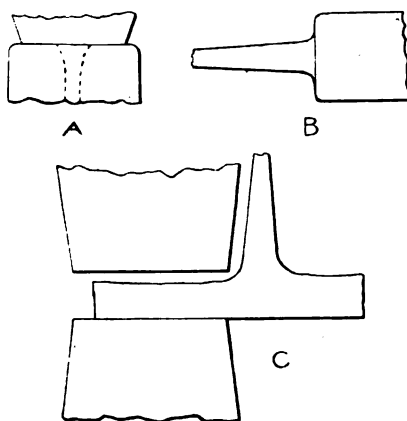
METHOD OF DRAWING DOWN STOCK FOR VALVE YOKES.
